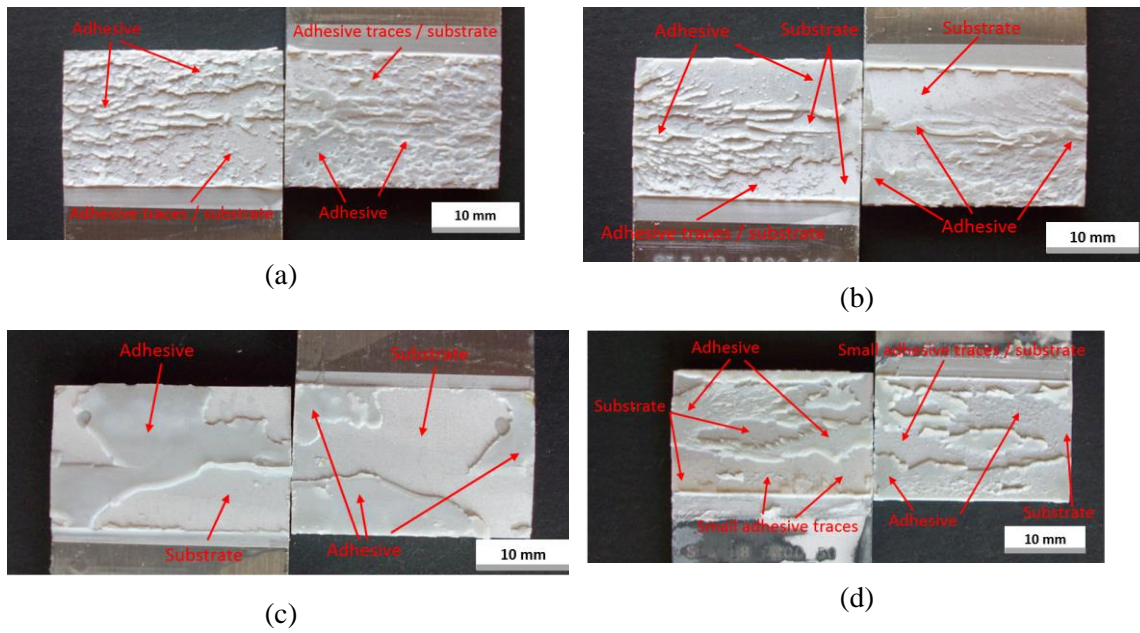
Photographs showing details of fracture surface of aluminium SLJs pre-treated with laser ablation ( $ED = 0.51 \text{ J/mm}^2$ ,  $H = 100 \mu\text{m}$ ) and subjected to different ageing methods: (a) unaged; (b) method(A); (c) method (B); (d) method (C)
